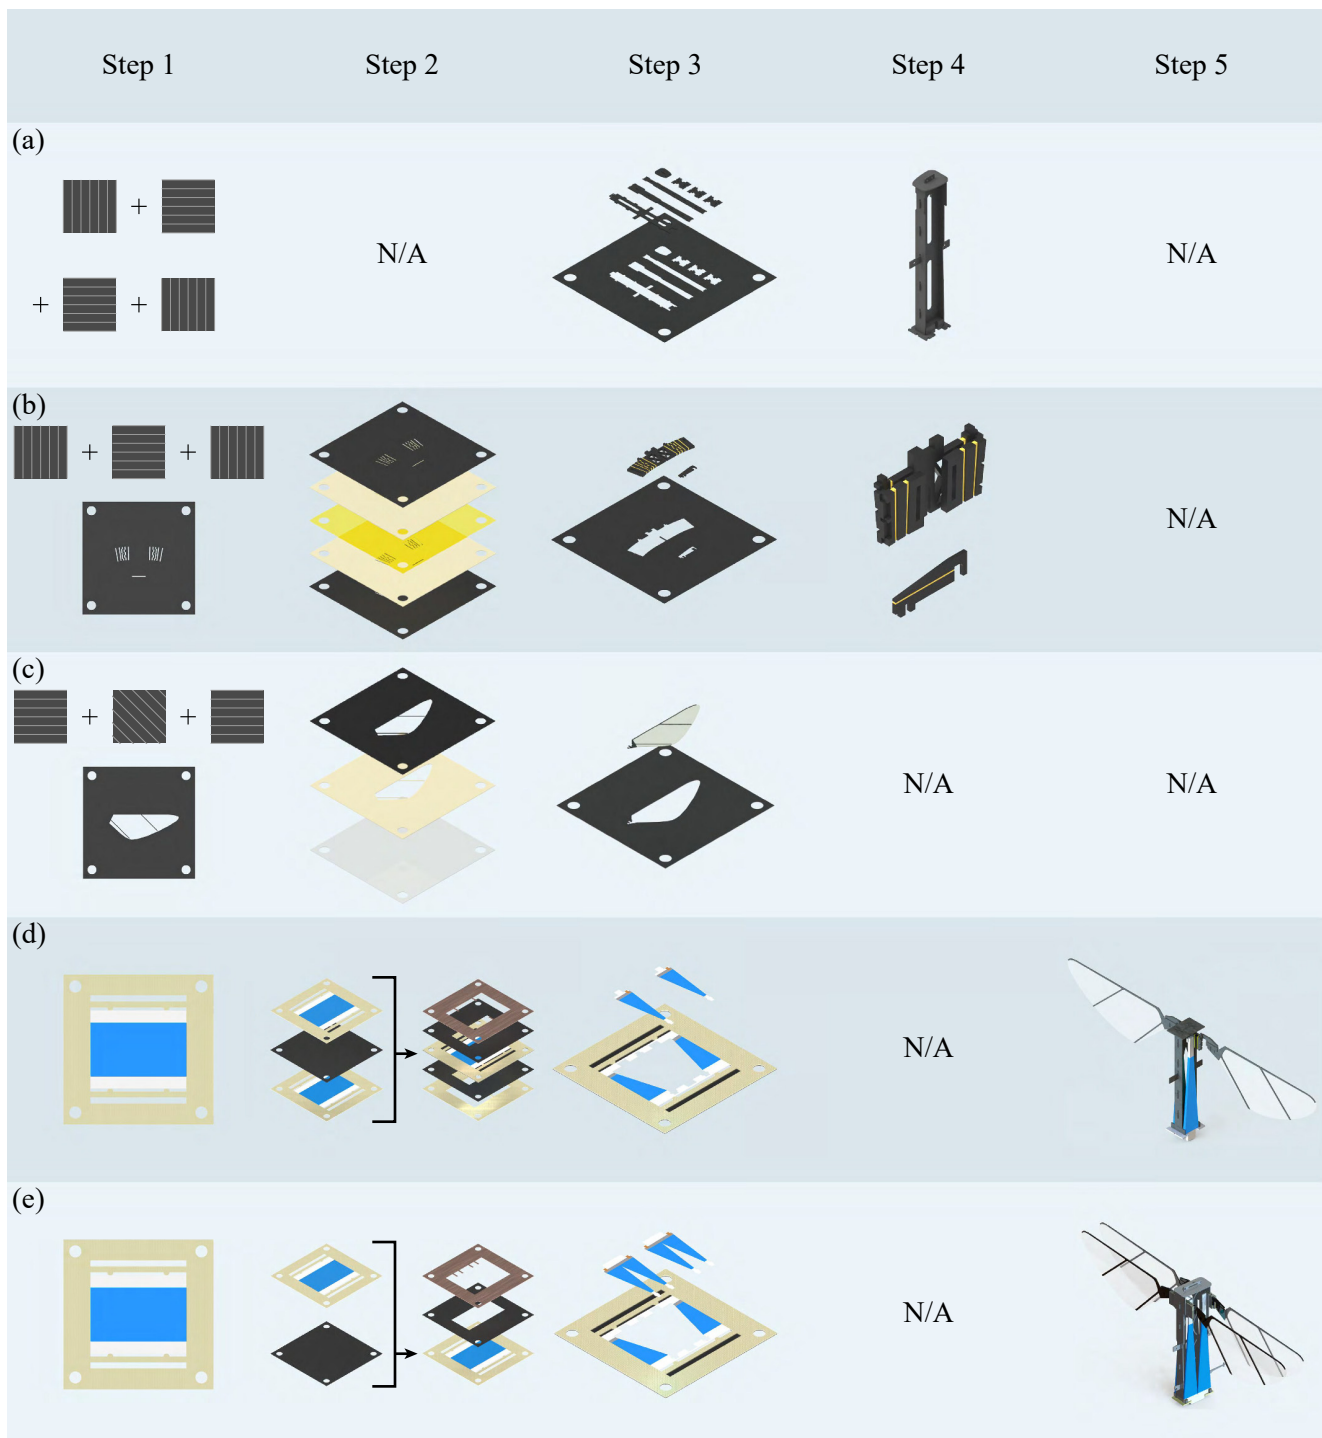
Fabrication of the main robotic parts that compose the RoboBee and Bee⁺⁺ prototypes. Excepting the actuators, the principal components of both robotic models are manufactured through very similar procedures. In general, a prototype is built in five steps. In Step 1, multilayer laminates are manufactured through the application of pressure and heat, or by assembling matching premachined pieces of material previously cut using a DPSS laser. In the fabrication of transmissions, hinges, and wings, additional permanent assembly features are laser cut in this step. In Step 2, the laminates fabricated in Step 1 are pin-aligned in stacks that are cured using heat and pressure to create
